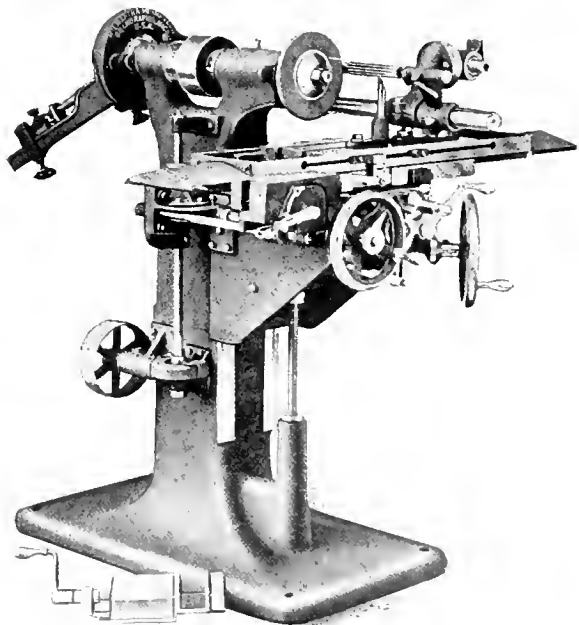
Centers for Reamer Grinding in Use on Table of Surface Grinder.
